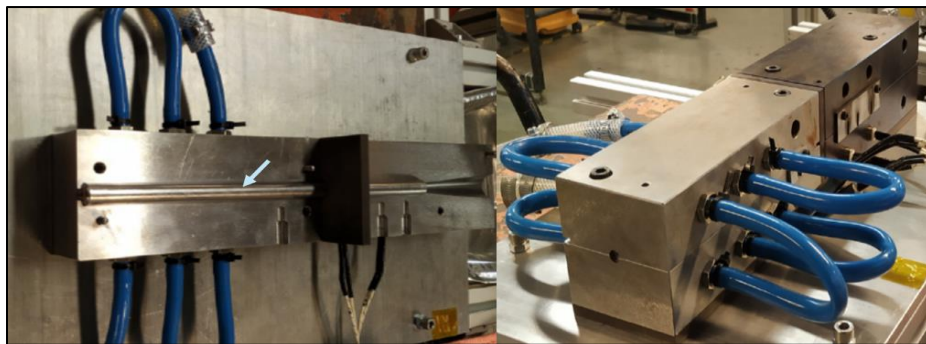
Pultrusion die with a one-piece replaceable cavity core: (Left) middle section view of the die with replaceable core ('blue' arrowhead); (Right) full view of the die [8].
